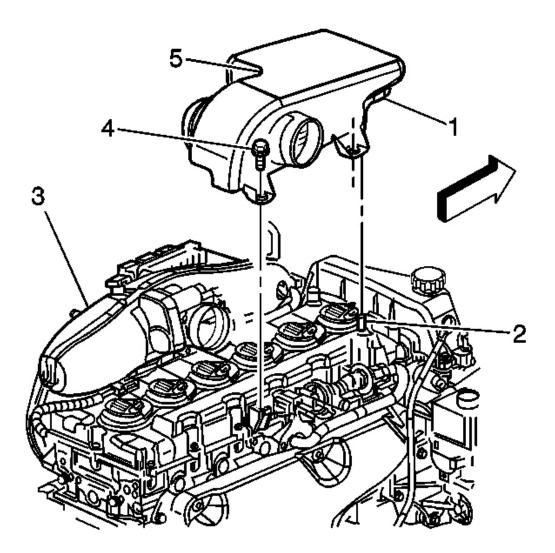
View Of Engine Bolts & Air Cleaner Outlet Resonator Courtesy of GENERAL MOTORS CORP.
